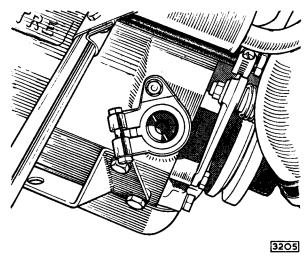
Showing the position of the distributor drive shaft offset when Number 6 (front) piston is on Top Dead Centre,
